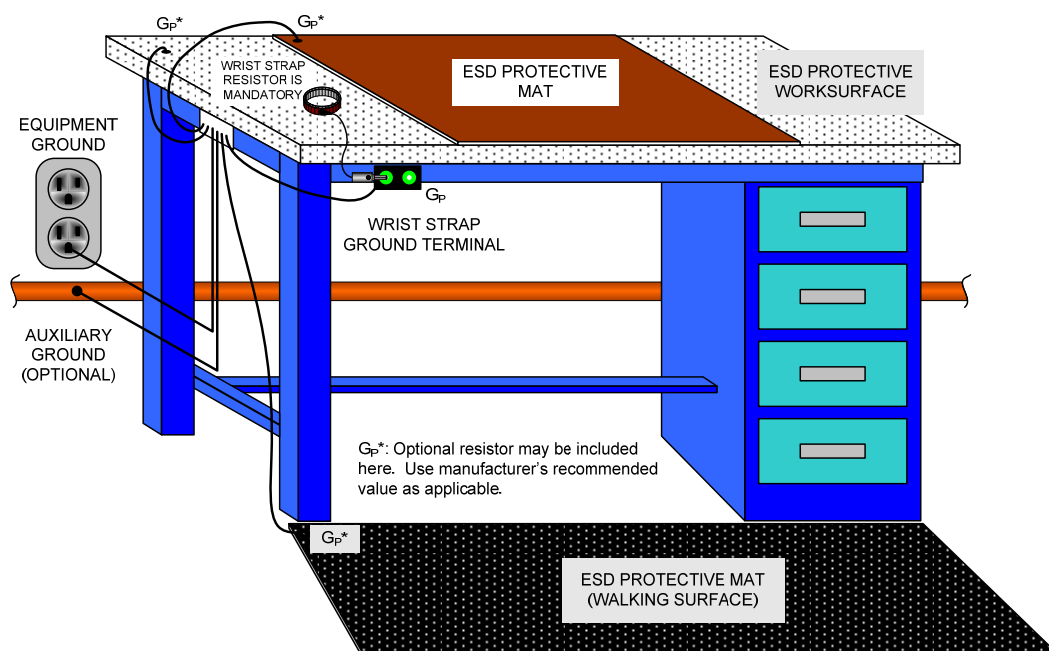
Typical ESD Grounded Workstations (Courtesy of JSC)
